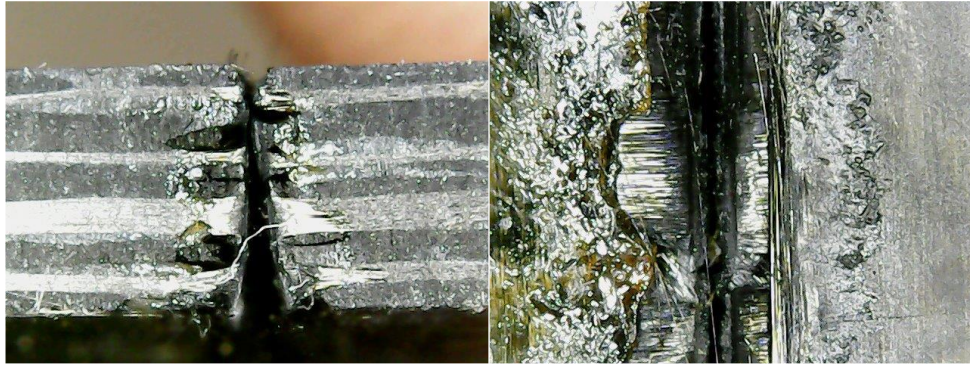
Microscope images of edge side (left) and top side (right) of laser cutting test 49.
